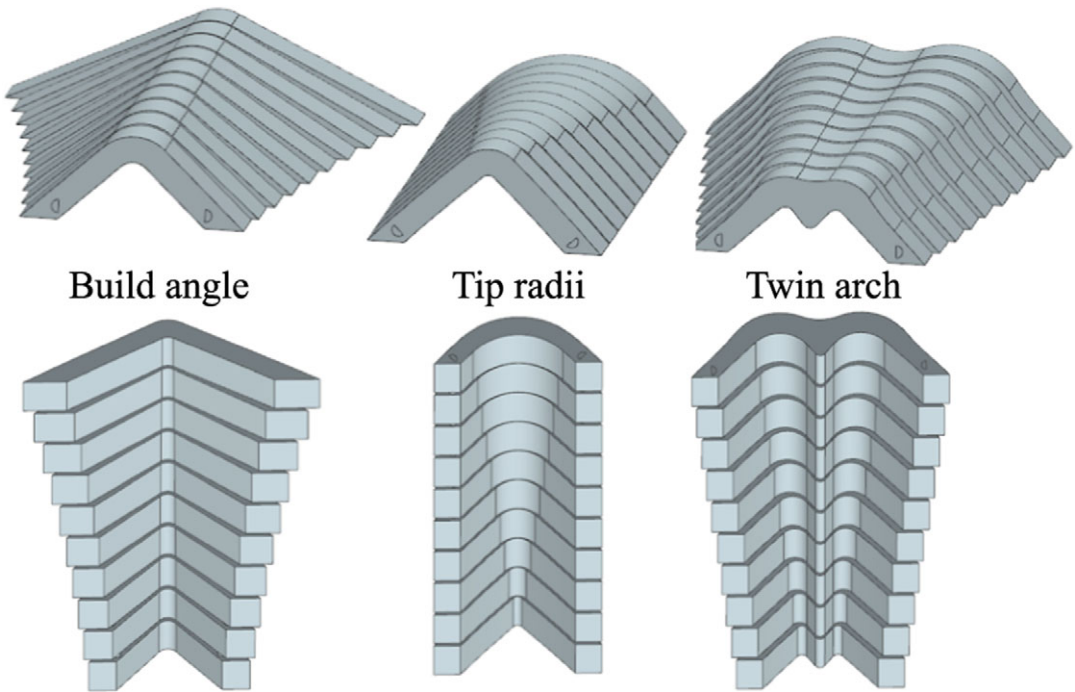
Roof geometry artefacts designed to test the machine’s capability for manufacturing potential roof geometries, revised from Dordlofva and Törlind (2020).
